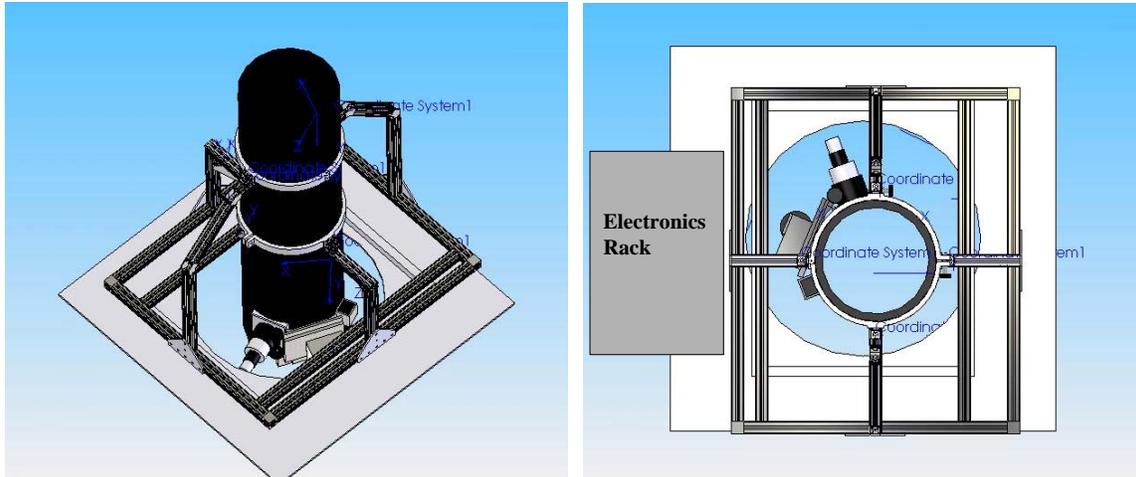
Airborne remote methane leak detector mounting apparatus drawing.
